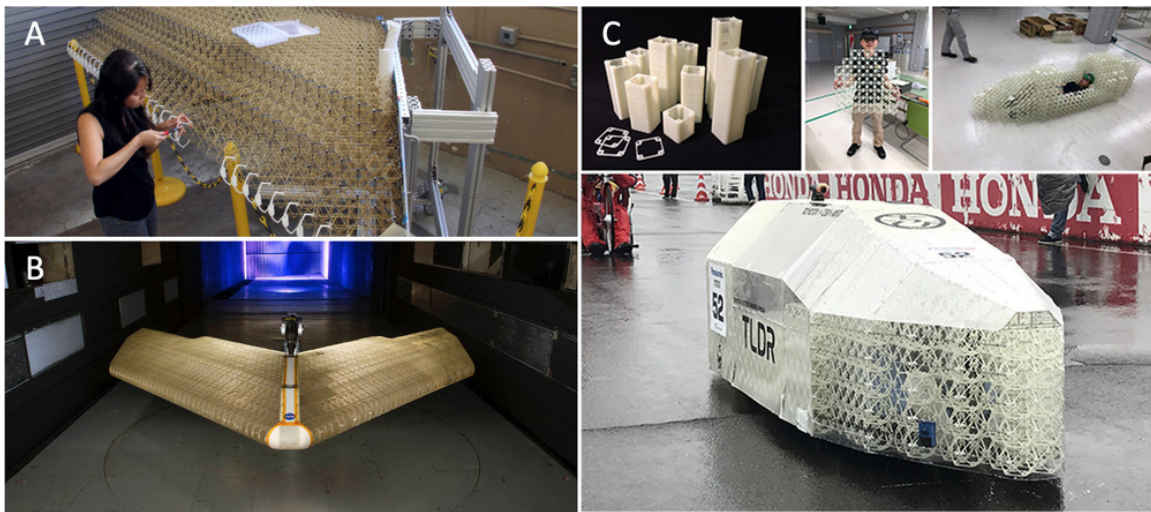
Large-scale voxel assemblies. A) Hand assembly of MADCAT [21]; B) Completed MADCAT [19]; C) TLDR, a lightweight voxel based race car built with Toyota [20]
